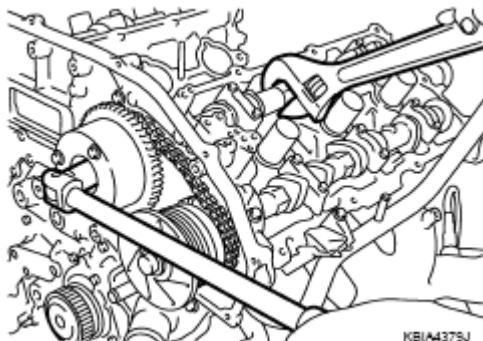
Identifying Intake And Exhaust Camshaft Sprocket Bolt
